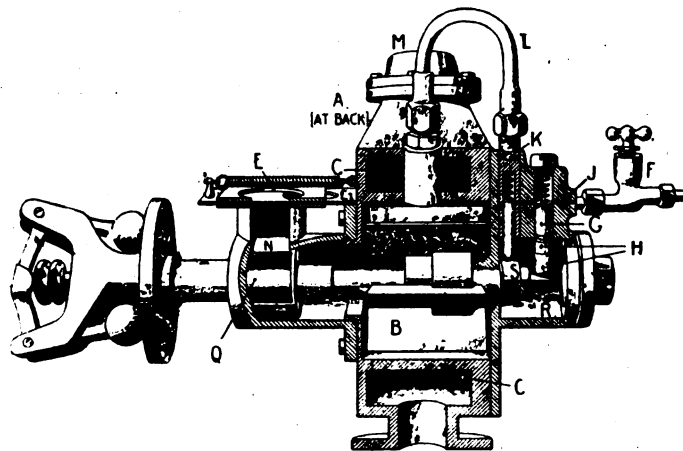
Sectional View of Davis Paraffin Carburettor.
